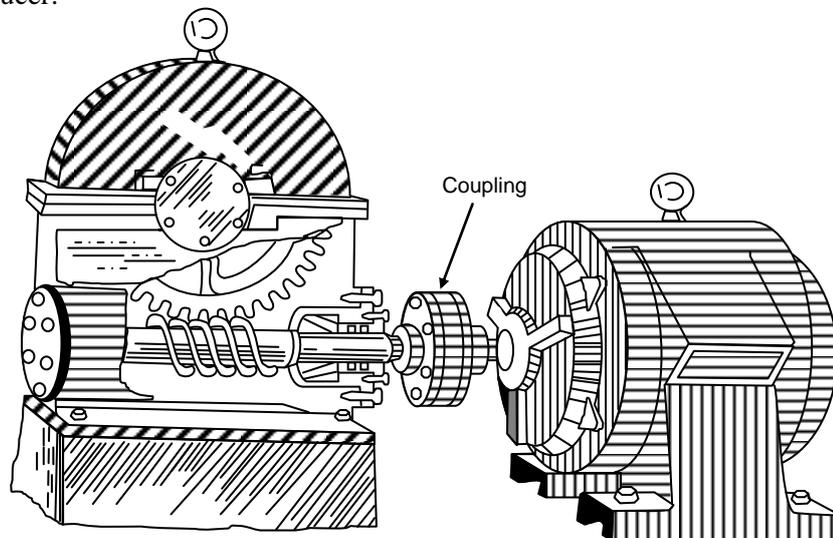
A Permanent Coupling Connecting Coaxial Shafts of an Electric Motor and a Worm and Worm Wheel Reducer
